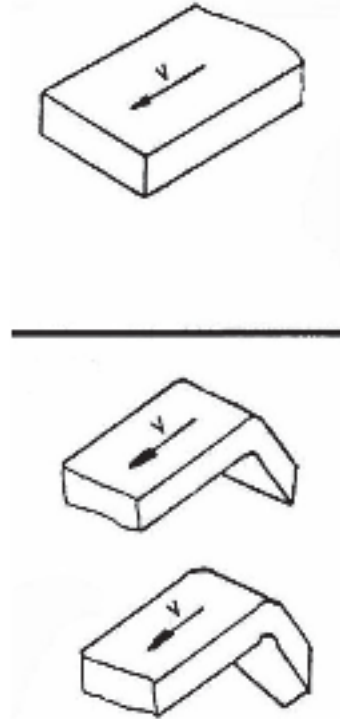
Flat impact scraper and cranked drawing scraper (after Autorengruppe TAG 2016, p. 38).
